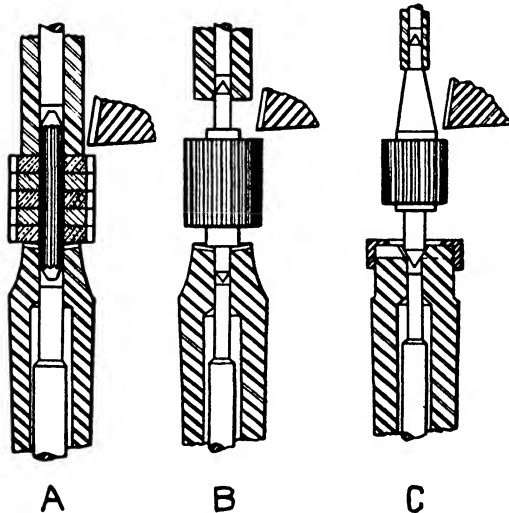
A. —Mounting five blanks in a mandrel for use with magazine feed.
